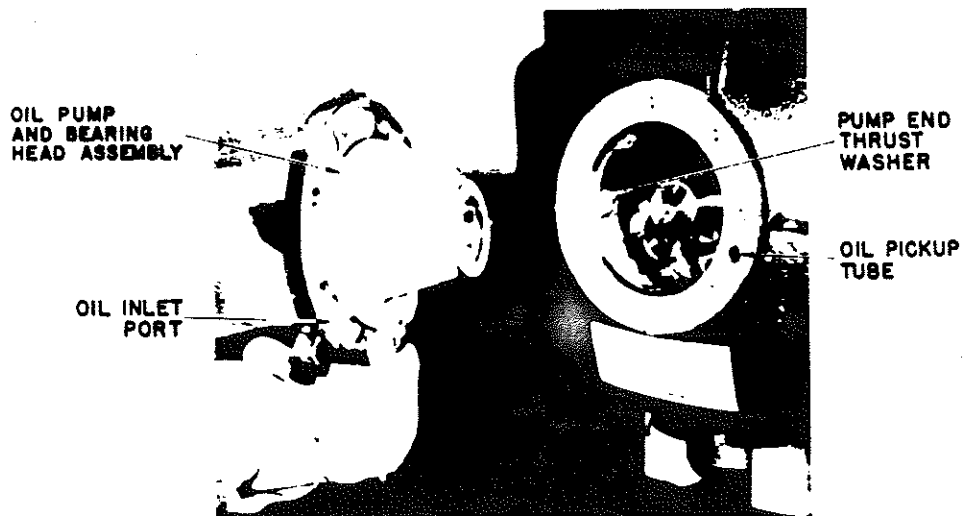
Installing Oil Pump and Bearing Head Assembly and Pump End Thrust Washer
